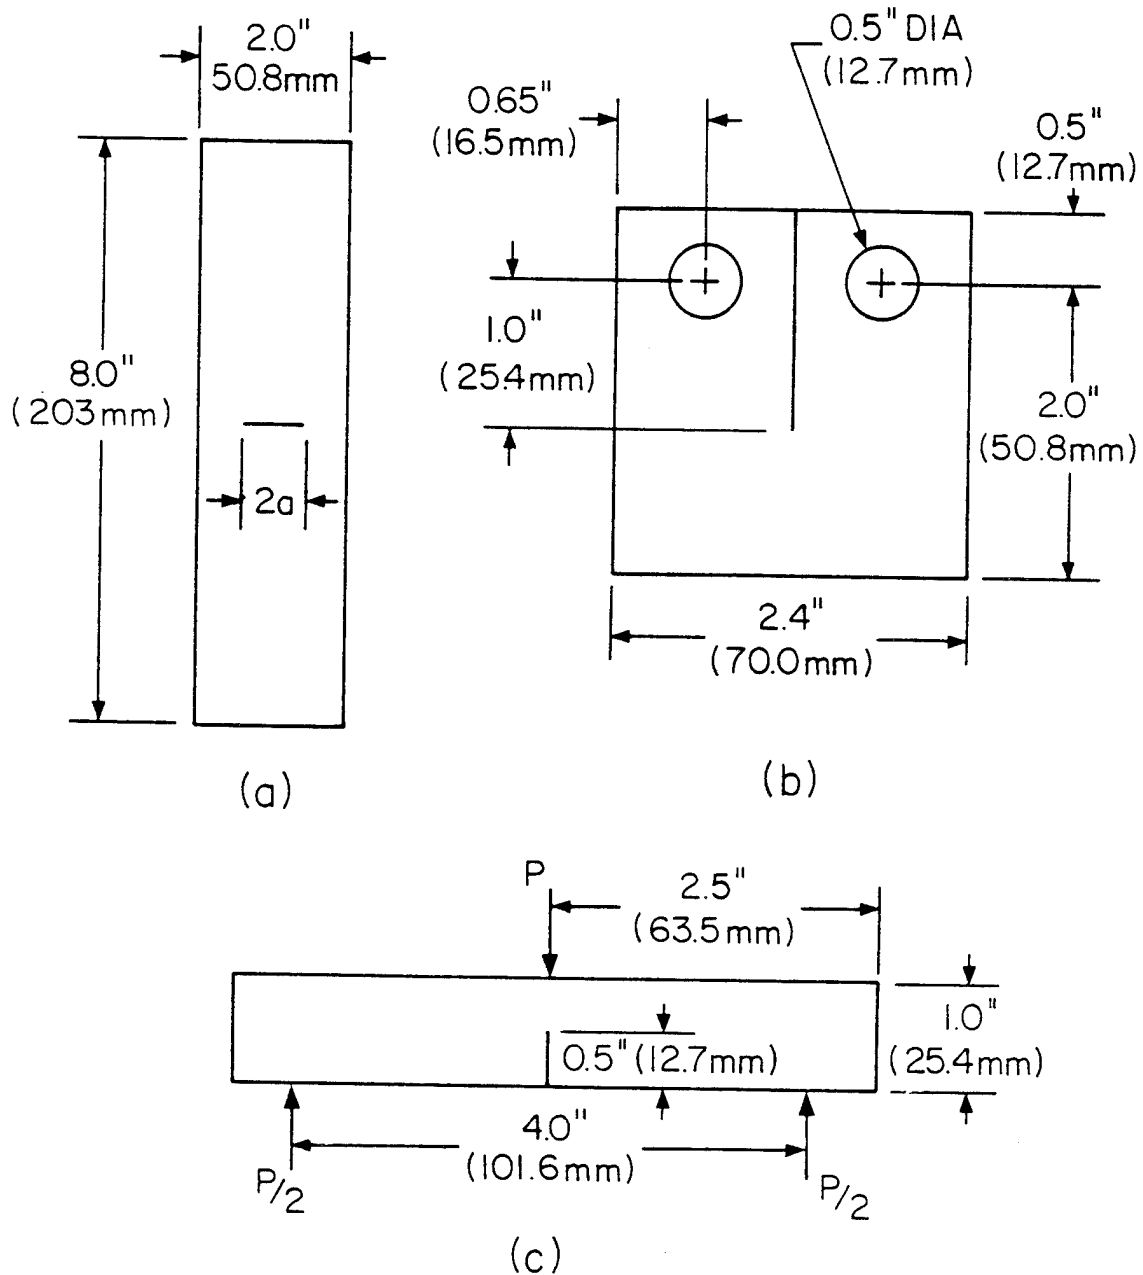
Drawing of the Specimen Geometry with Dimensions
